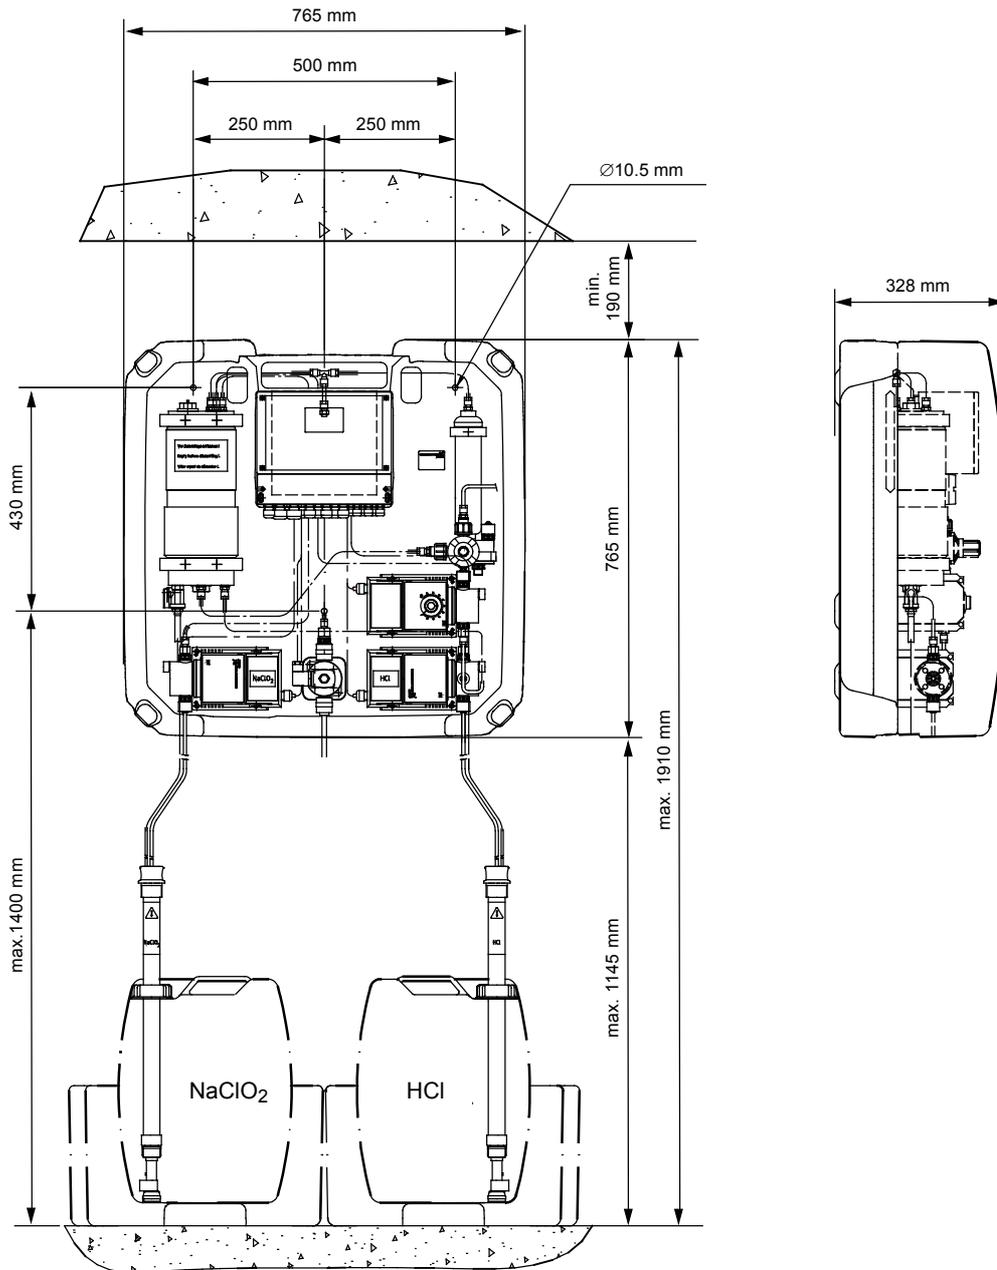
Oxiperm Pro with drill holes (OCD-162-5, -10)
